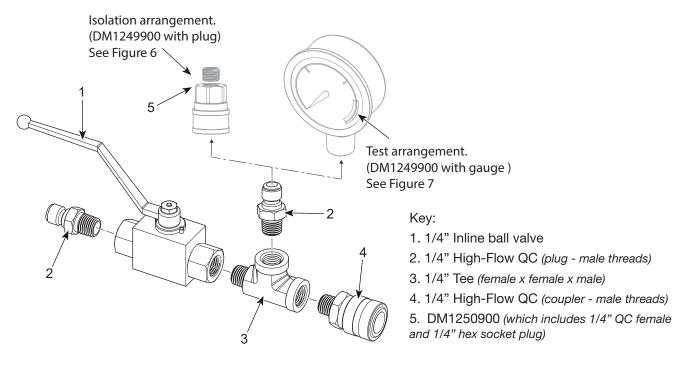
DM1249900 - Test/Water Header Assembly Overview
